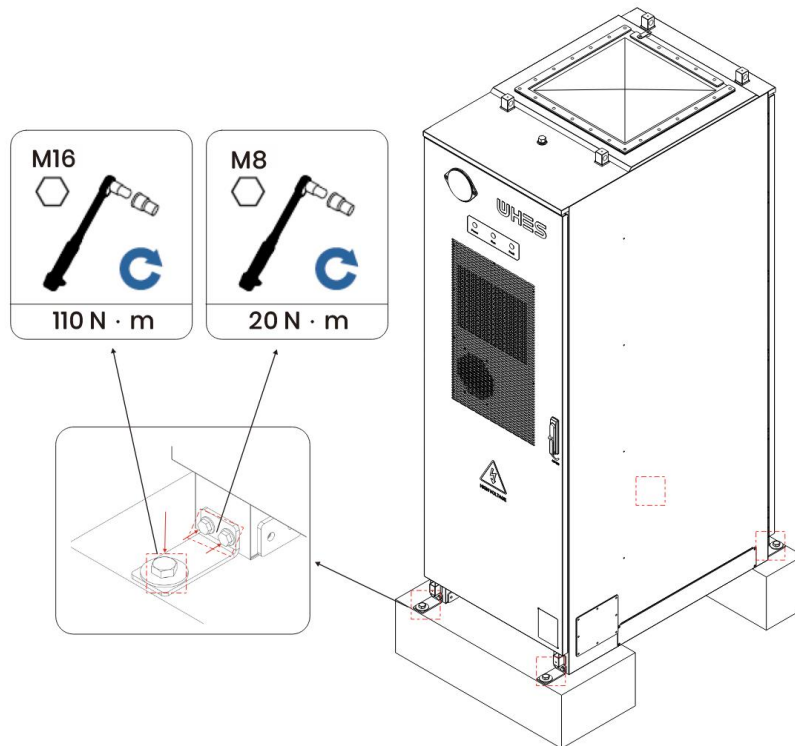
Secure the Cabinet to the Installation Platform and Install the Left and Right Cover Plates
